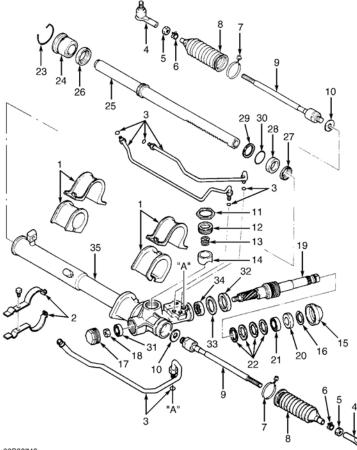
Exploded View Of Rack & Pinion Steering Gear (MX-3 1.8L) Courtesy of MAZDA MOTORS CORP.
